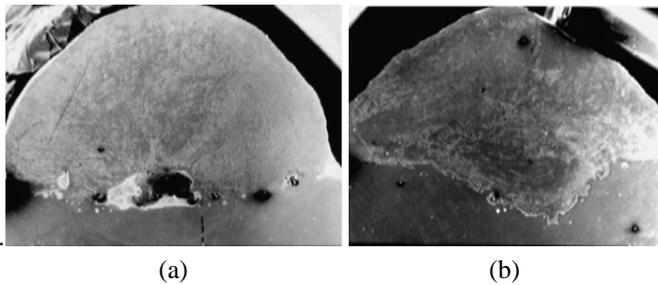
Low magnification micrographs of weld bead at (a) low heat input (28 V, 275 A, 325 mm/min) and (b) high heat input (28 V, 275 A and 225 mm/min) [24]
